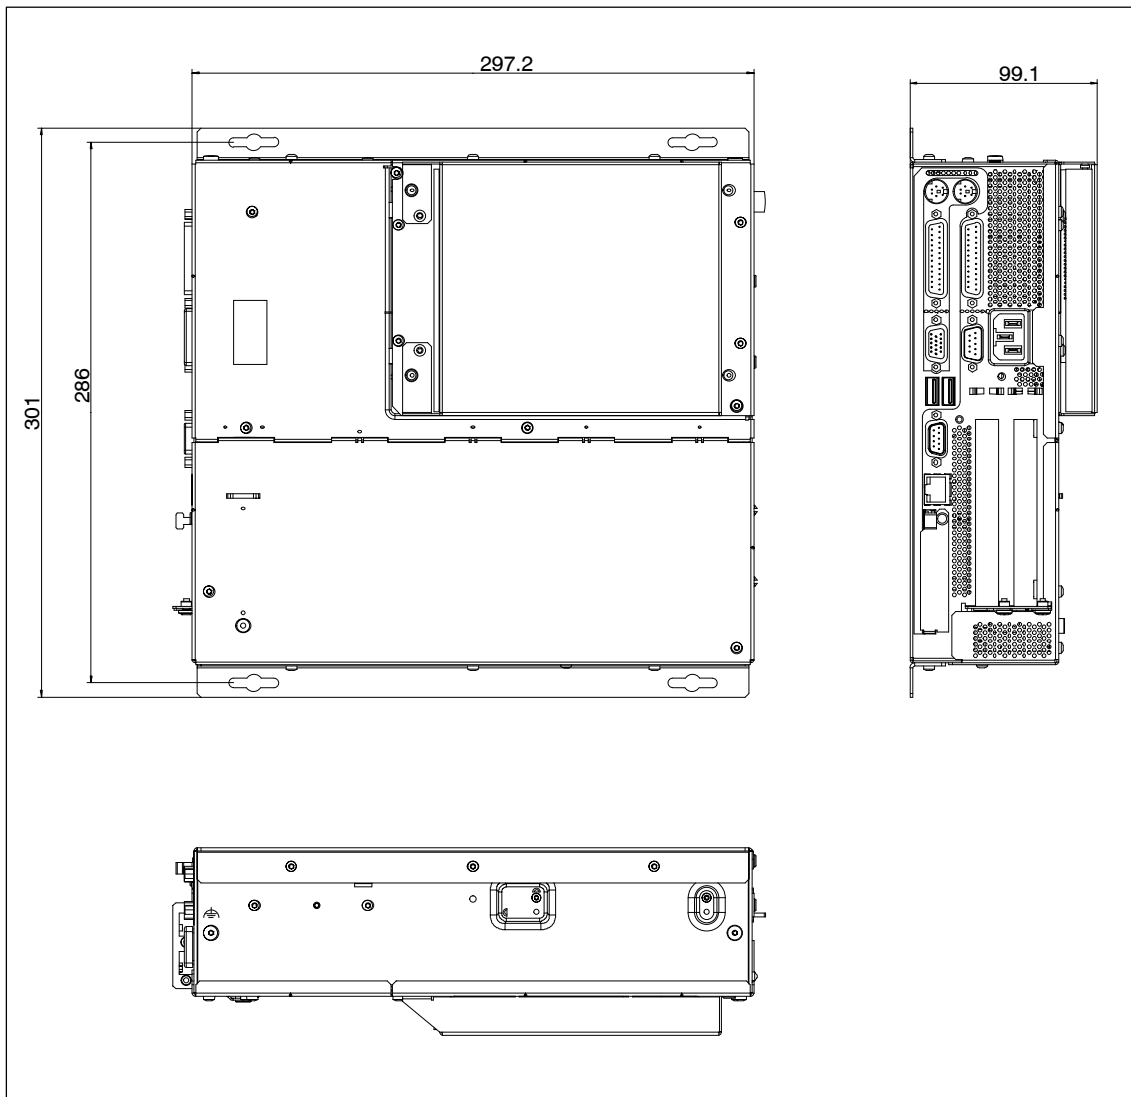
Dimension Drawings for Fitting in Control Panel with Installation Angle (Device with CD ROM Drive)
